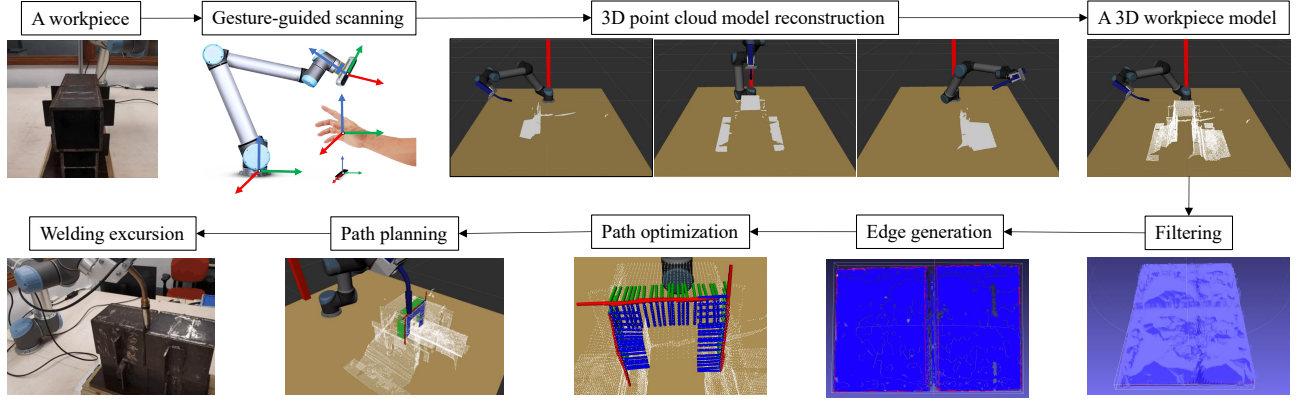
Overview of the automatic robotic welding pipeline. Given a workpiece, a gesture-guided scanning is executed to merge captured point clouds into a completed 3D model, which is further improved with the bilateral filter. Subsequently, on basis of the edge points detected using an edge intensity gradient-based algorithm, a 6-DOF welding path is established.
